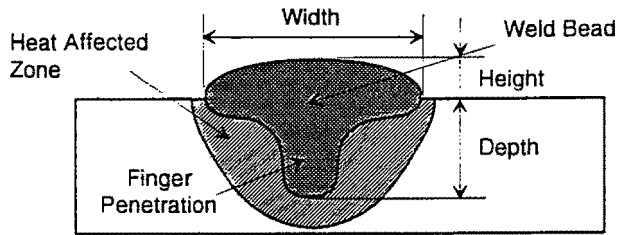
Typical weld cross-section for gas metal arc welding.
